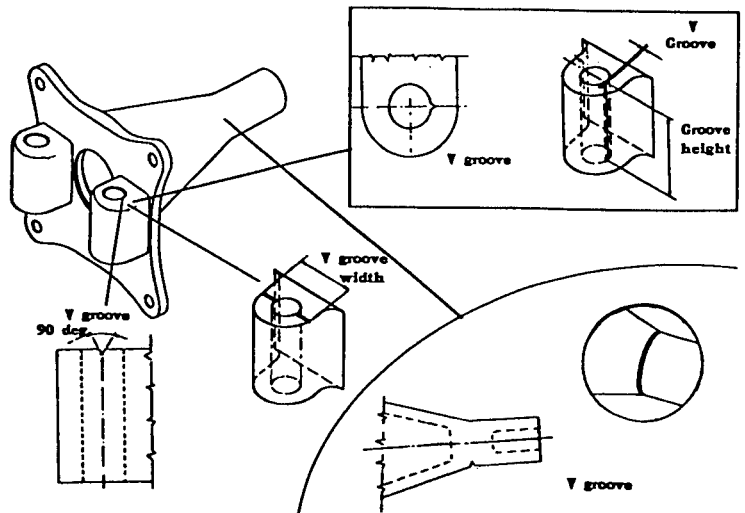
M.R. Hub Support Cone - 'V' grooves of flawed components for fatigue tests
